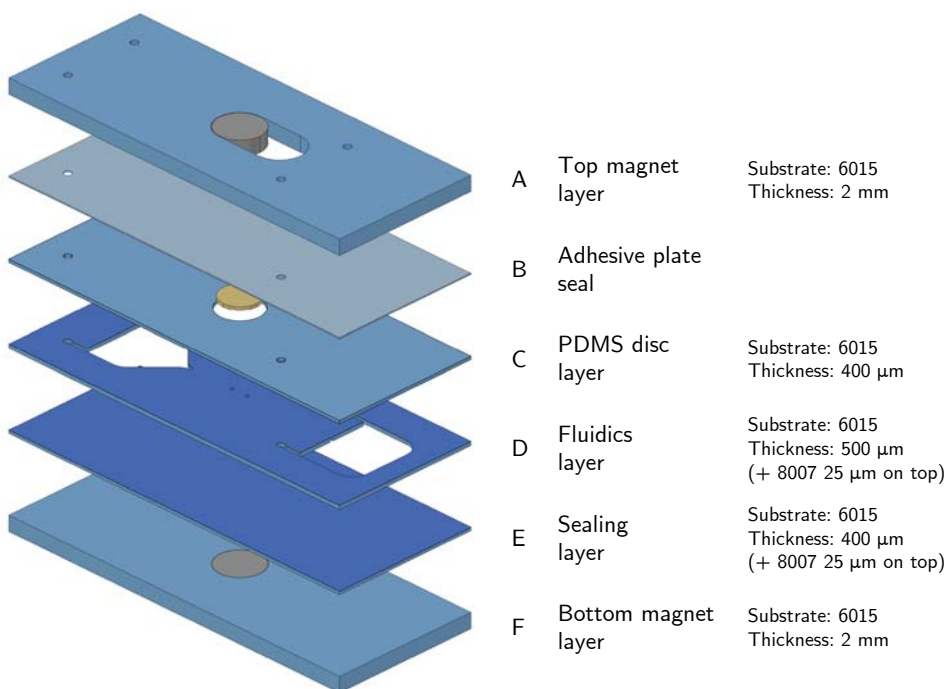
Layers of the prototypes integrating a PDMS disc inside the valve.
